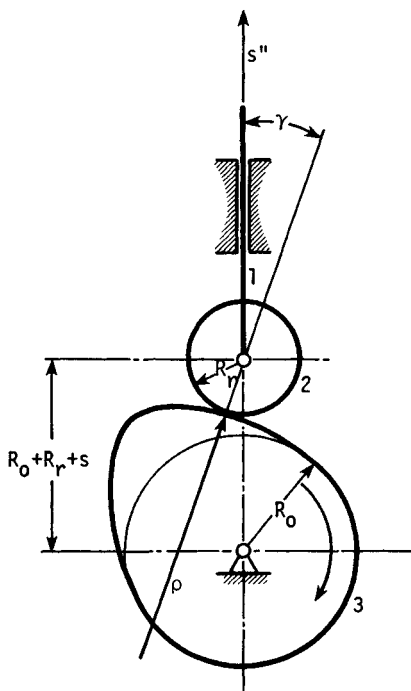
Cam mechanism with reciprocating roller follower.
